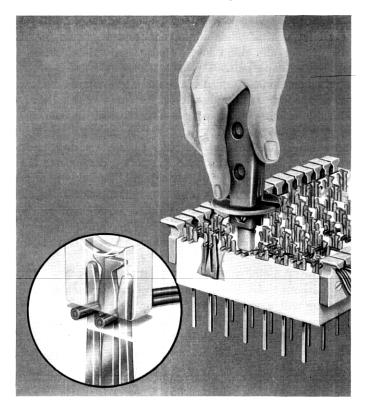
Distributing frame connecting blocks and insertion tool.
